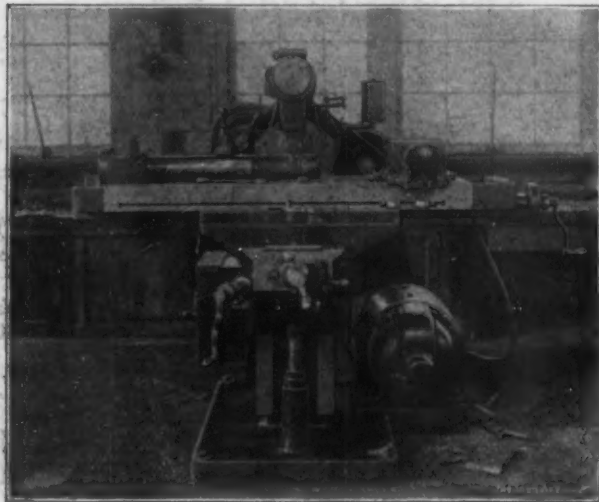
A Milling Machine Chain-Connected to Its Motor.
